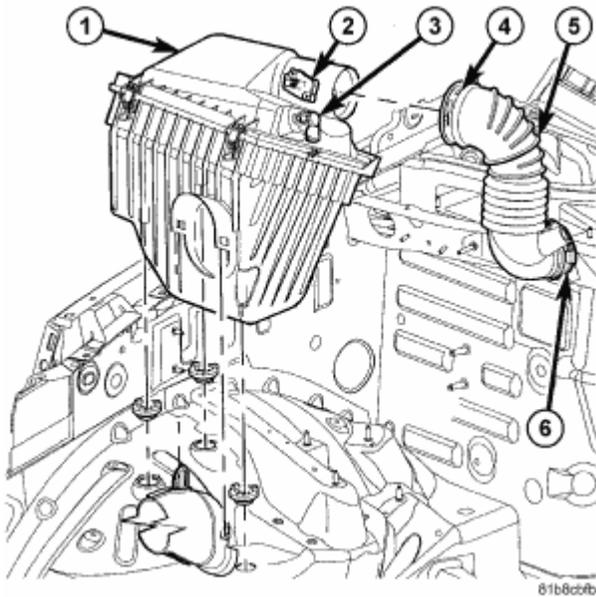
Removing/Installing Intake Air Pressure & Mass Air Flow Sensor
